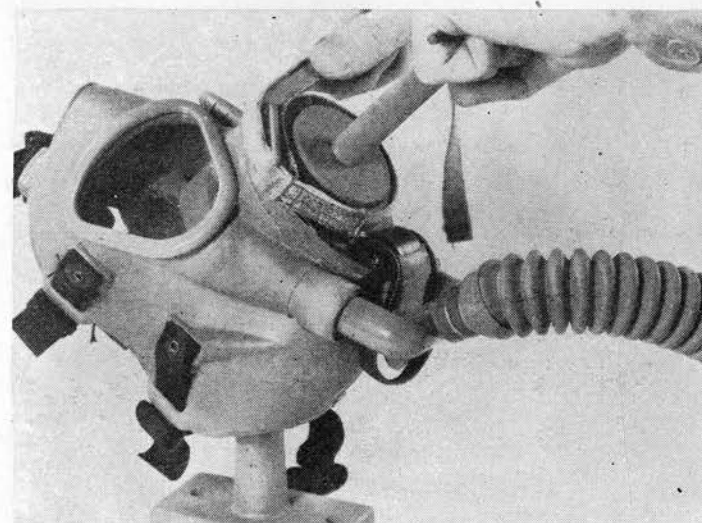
Using strap wrench in replacing diaphragm in diaphragm facepiece M3 and optical facepiece M1.
